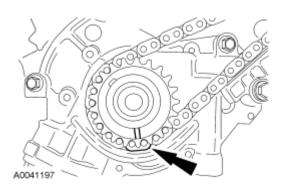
Aligning Copper (Marked) Link With Timing Mark On Crankshaft Sprocket Courtesy of FORD MOTOR CO.
